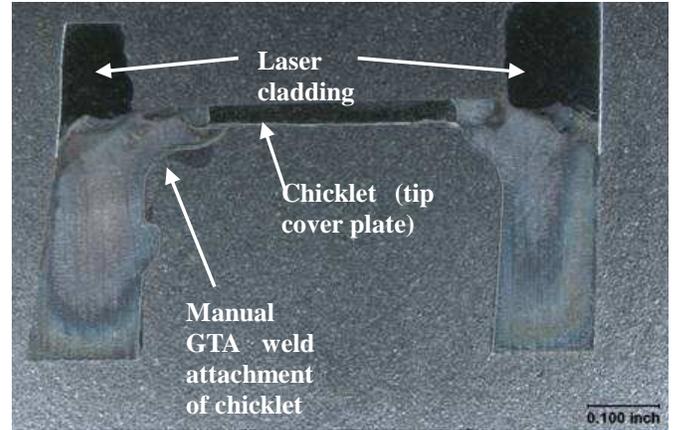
Manual GTA weld attachment of the chicklet and laser cladding of the squealer tip
